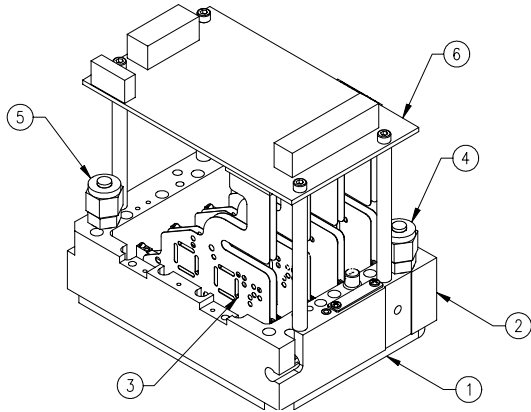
2.56 inch wide print swath assembly. 1: Nozzle / manifold assembly; 2:Supporting frame; 3:Twelve Jet modules; 4 Ink outlet; 5: Ink inlet; 6: Swath drive electronics interface board
